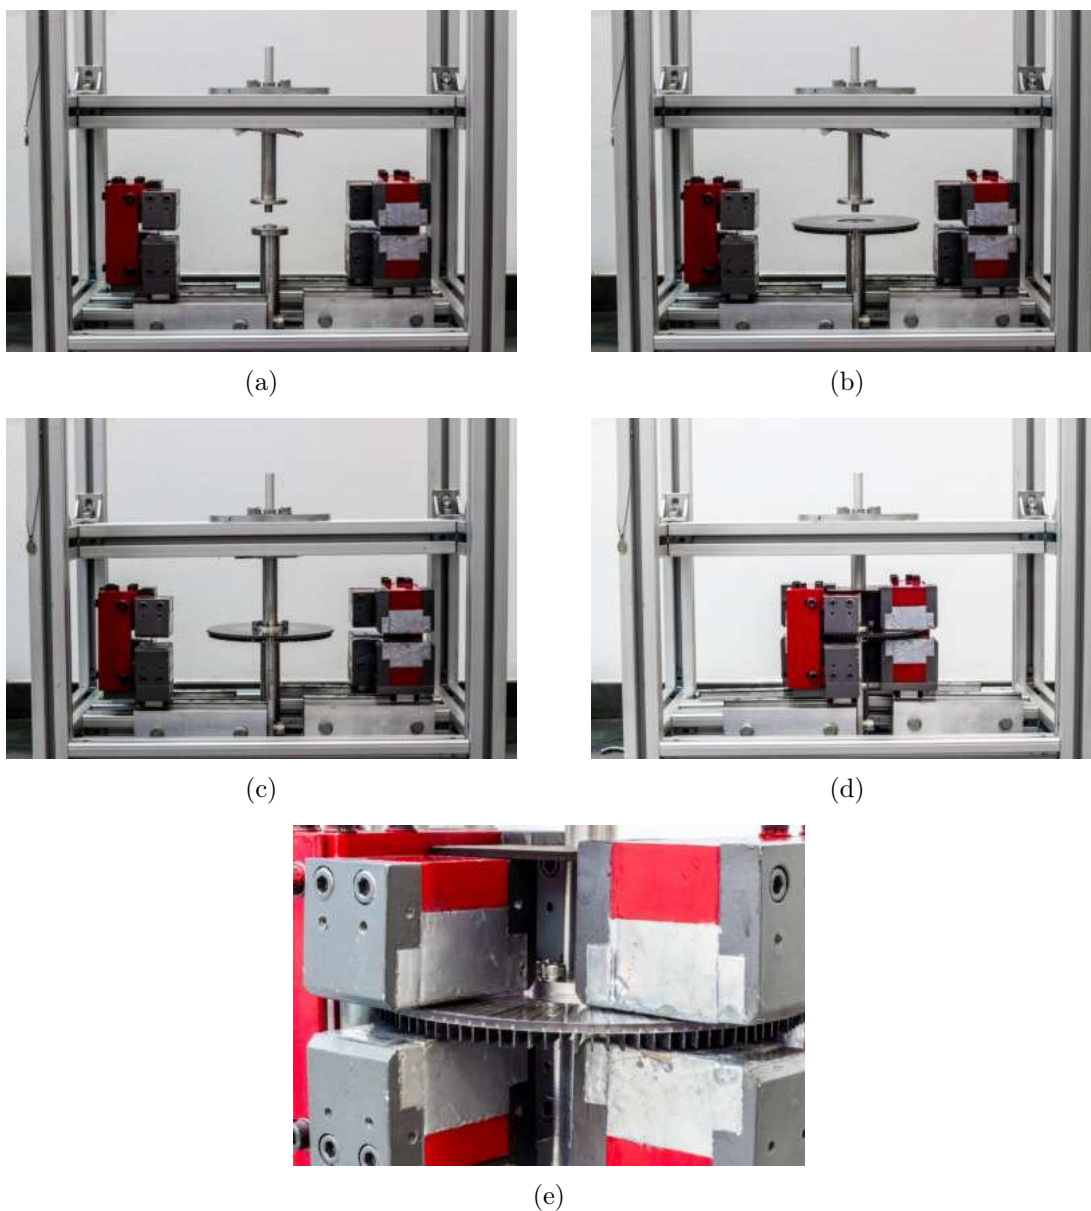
Transmission system and rotor assembly: (a) upper and lower rotational shafts connected to the motor rack by their respective bearing houses; (b) rotor assembly to the lower shaft; (c) complete assembly of the rotor and the transmission system; (d) transmission system centralized with the MC and; (e) details of the finned rotor and the MC after the final assembly.
